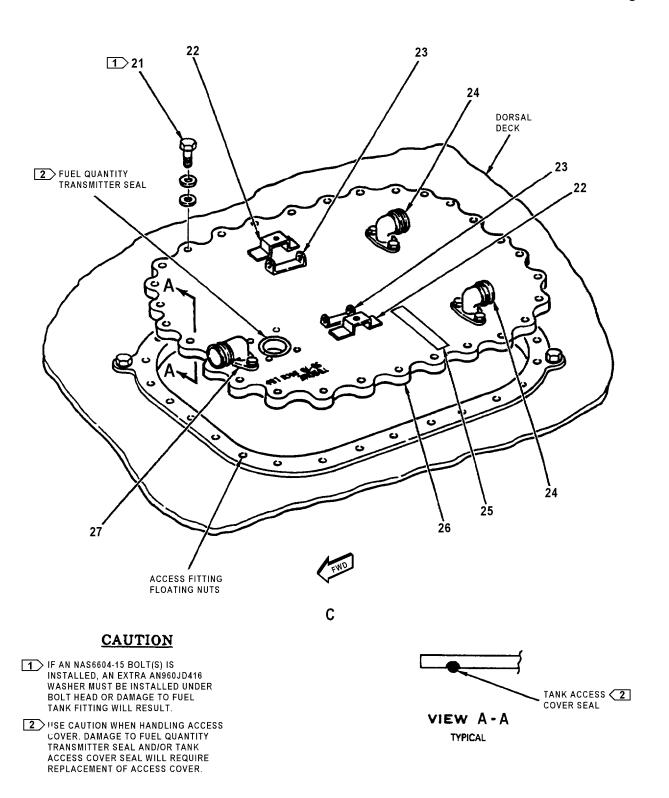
No. 4 Fuel Tank Aft Access Cover (Sheet 3)
